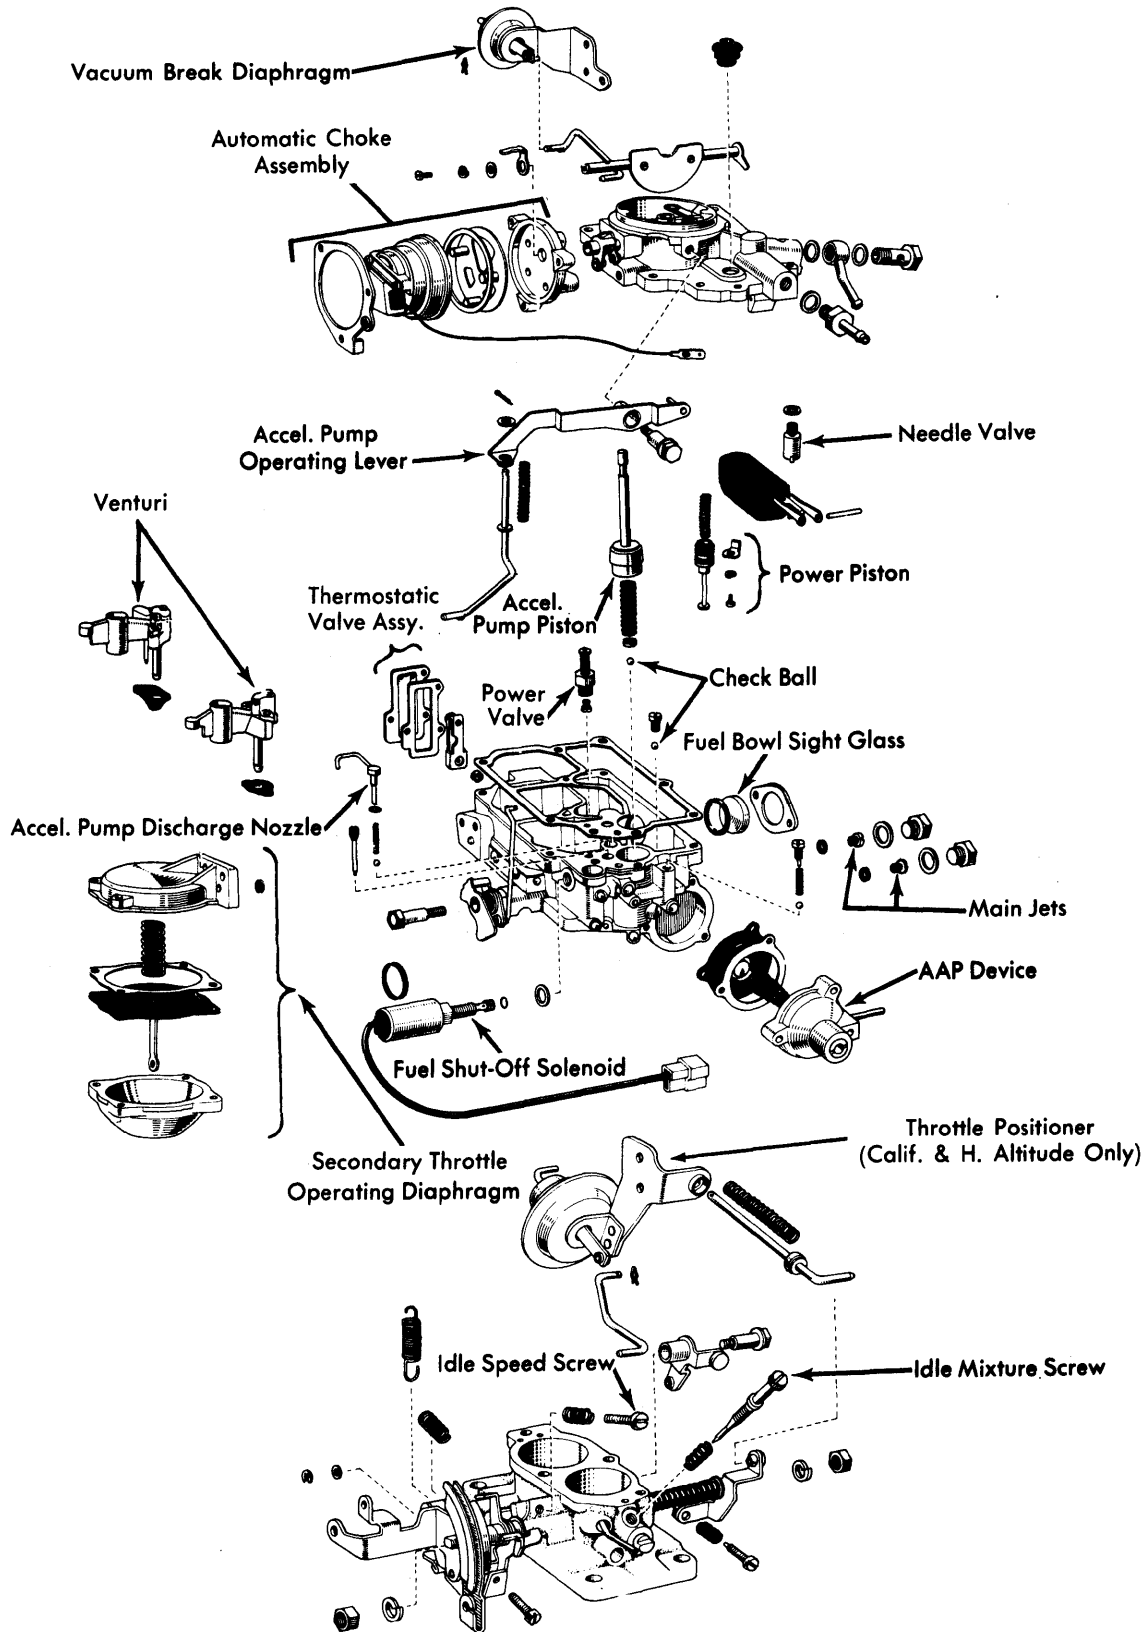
Exploded View of Aisan 2-Barrel Carburetor (Toyota 2T-C Engine)
